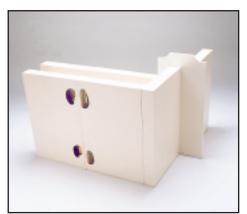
Typical thick and thin panel fabrication using various Type 3 Latches and Receivers for in-line butt joints, corners and 'T' joints.
